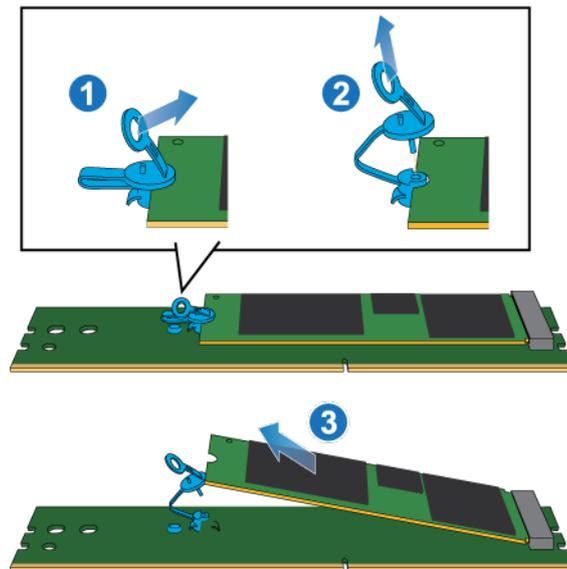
Removing the internal M.2 boot module from the M.2 boot module adaptor
